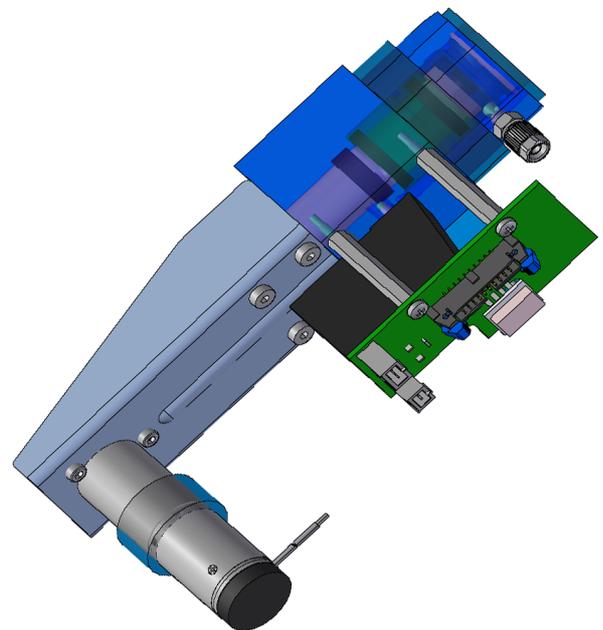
Motor-gear-pump Unit + Pressure Measurement Unit
